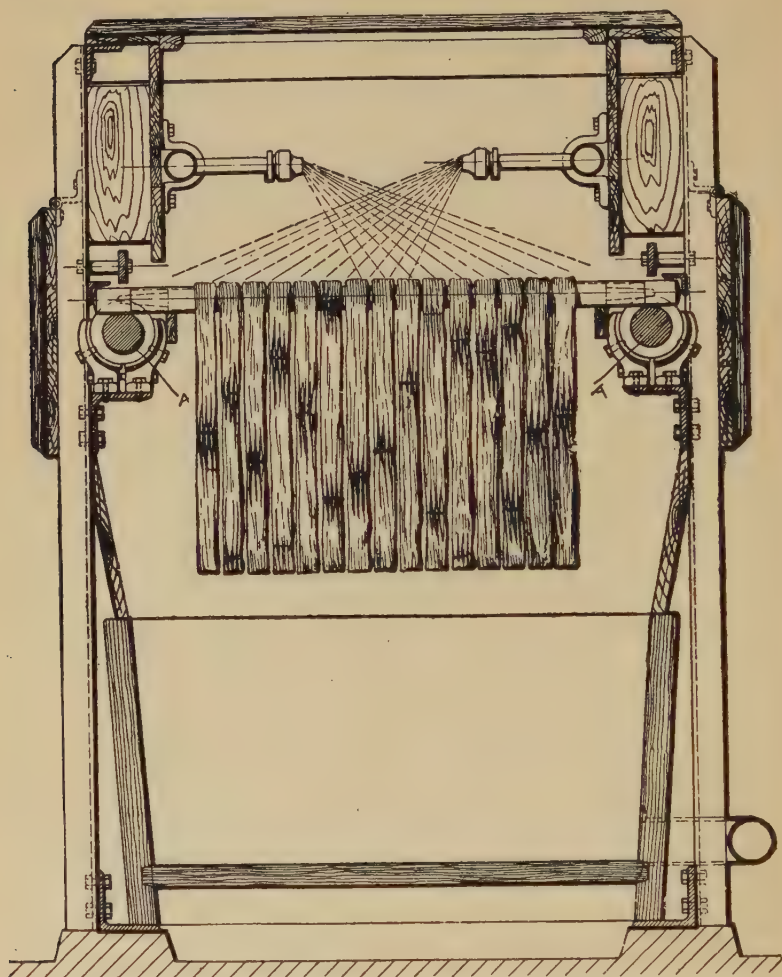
Front View—Skein Washing, Desulphurising, Bleaching, Souring Machine. (Courtesy C. G. Haubold A. G., Chemnitz.)
